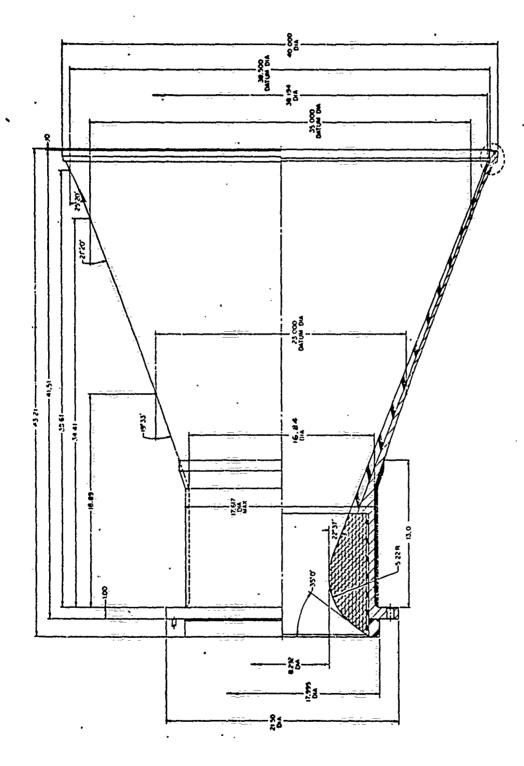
TX-354-3 ROCKET NOZZLE ASSEMBLY
